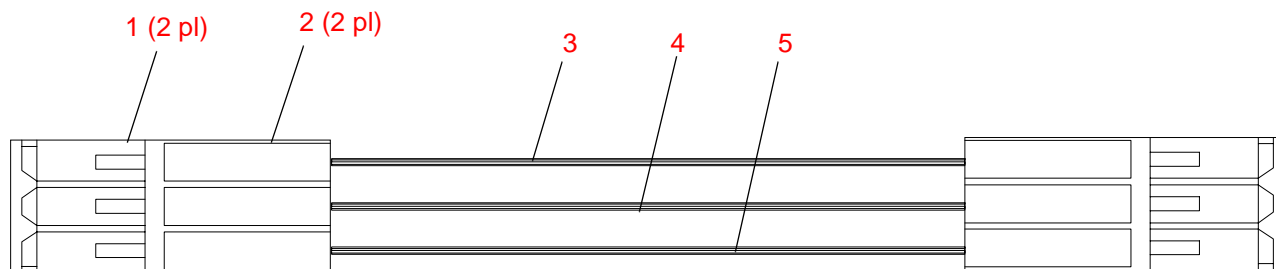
WH2 Sensor Jumper Cable Assembly
